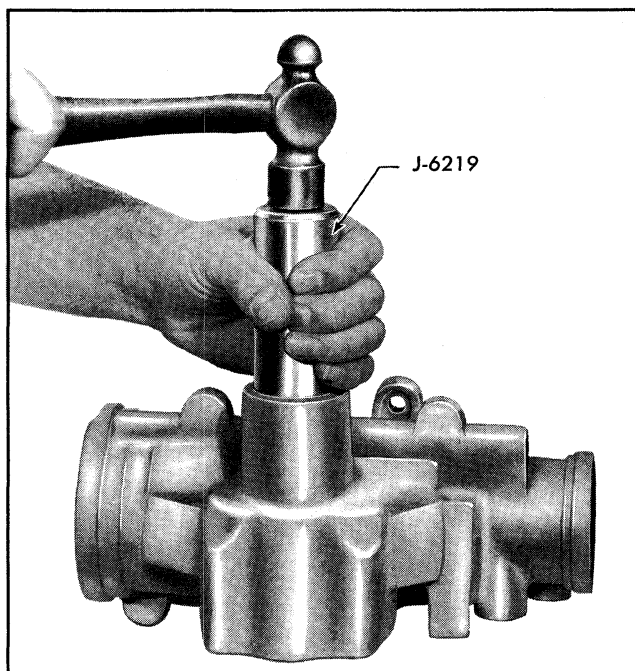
A-24 Installing Pitman Shaft Seals Using J-6219
